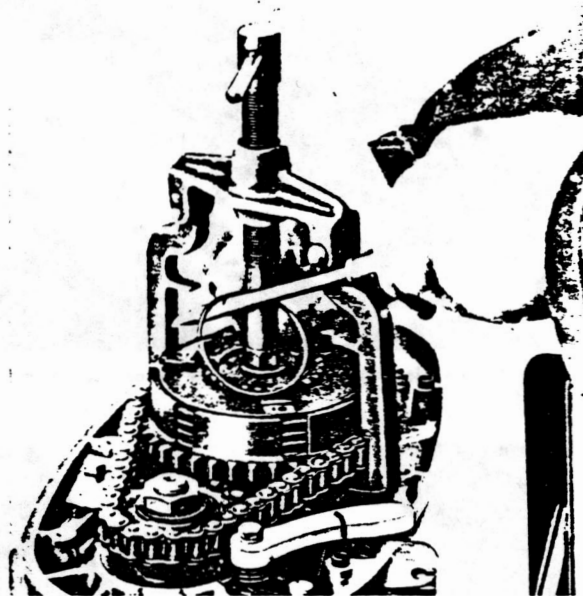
Fit clutch extractor and compress clutch. Remove spring ring.
